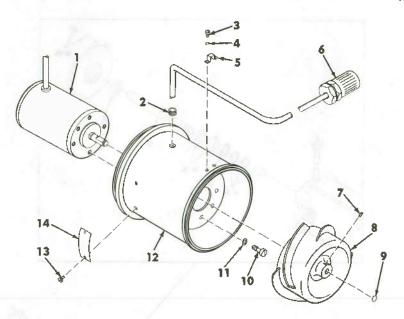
BRACKET /8171053 AND 8171659/-EXPLODED VIEW /SEE FIGURE 171 FOR NEXT HIGHER ASSEMBLY/
